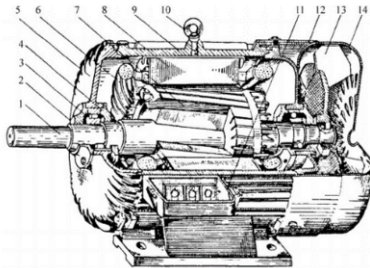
The structure of the AC induction machine. 1-shaft, 2, 4-bearing cap; 3-bearing; 5,12-frame; 6-stator winding; 7-rotor; 8- stator core; 9-base; 10-ring; 11-outlet box; 13-electric fan; 14-fan housing
